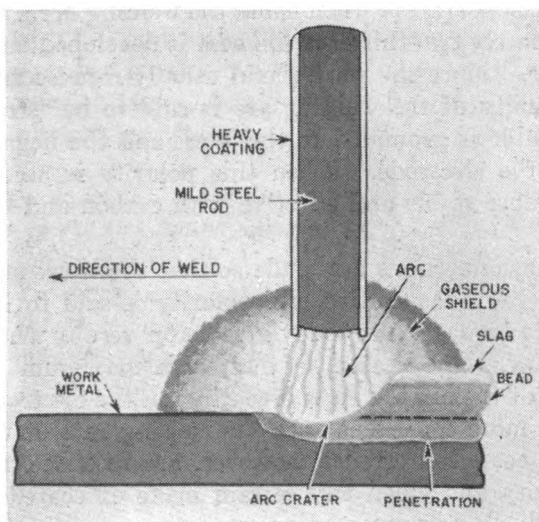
Diagram of shielded-metal welding arc.
